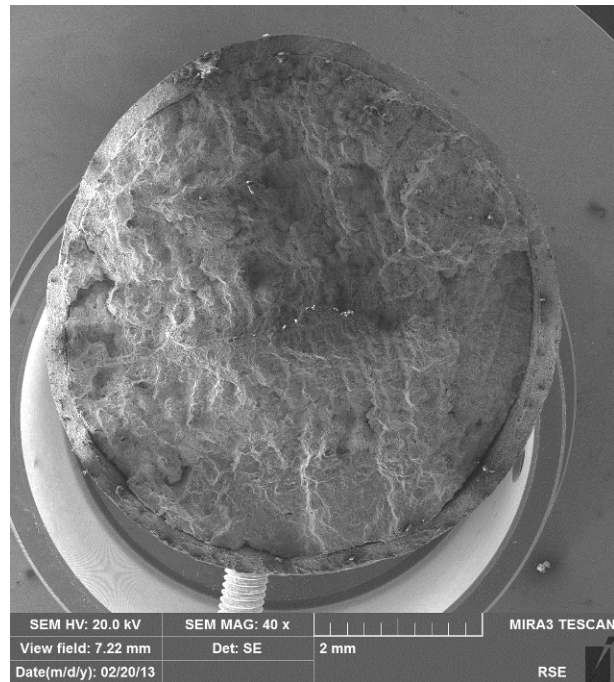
Fracture surface of broken specimen R262-1
